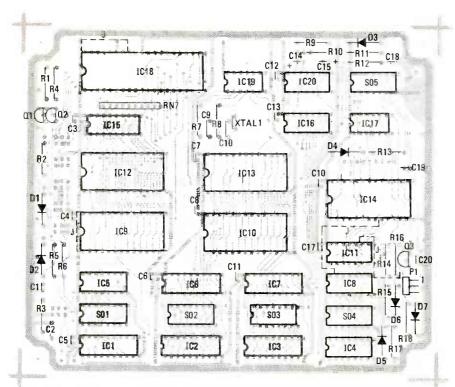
PARTS-PLACEMENT DIAGRAM for the computer board. The dashed lines represent foil-side jumpers. There are many "unused" pads; they are for future expansion and experimentation. For example, note that a 28-pin socket is provided for the 24-pin 2716 (IC14). That allows larger EPROM's to be programmed. Simply plug the 2716 (or other 24-pin device) into the socket leaving pins 1 and 2 of the socket unoccupied.
